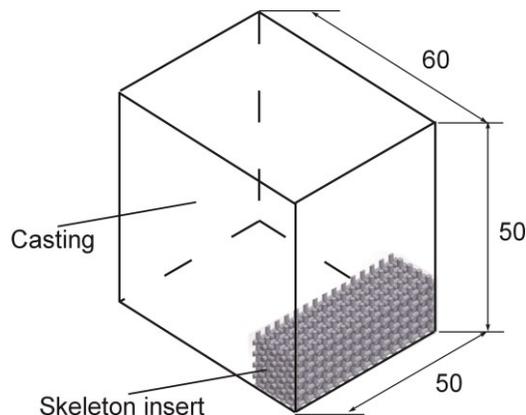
Shape and dimensions of casting and position of scaffold insert
